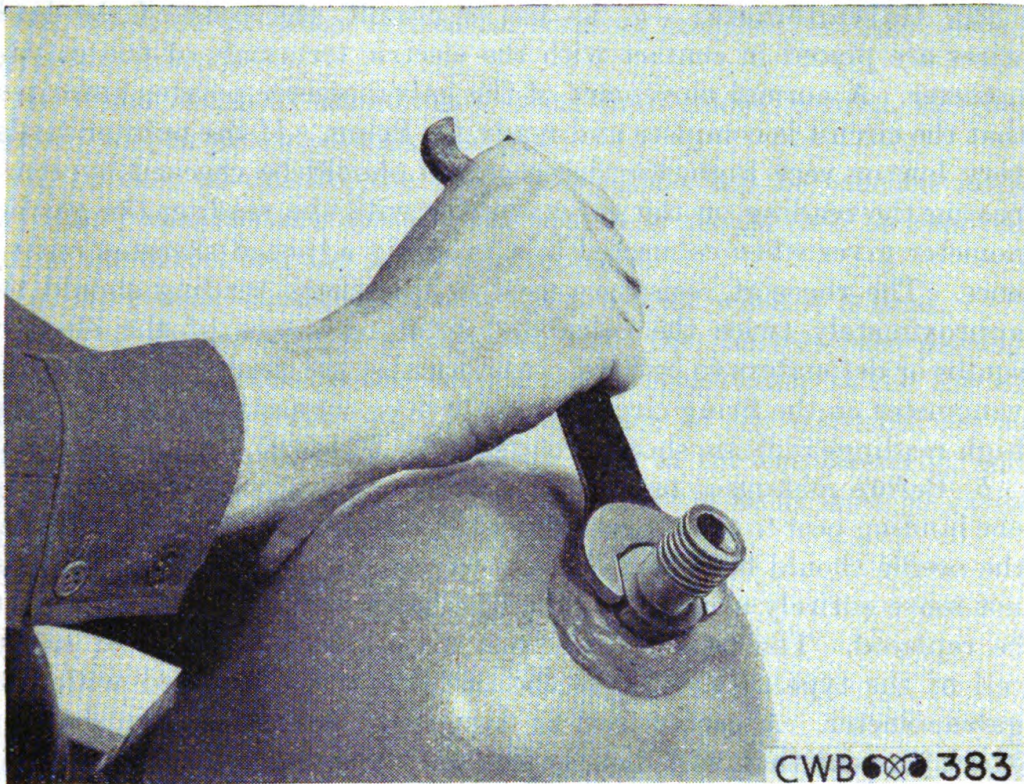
Burster-tube assembly screwed into shell and tightened with wrench.
